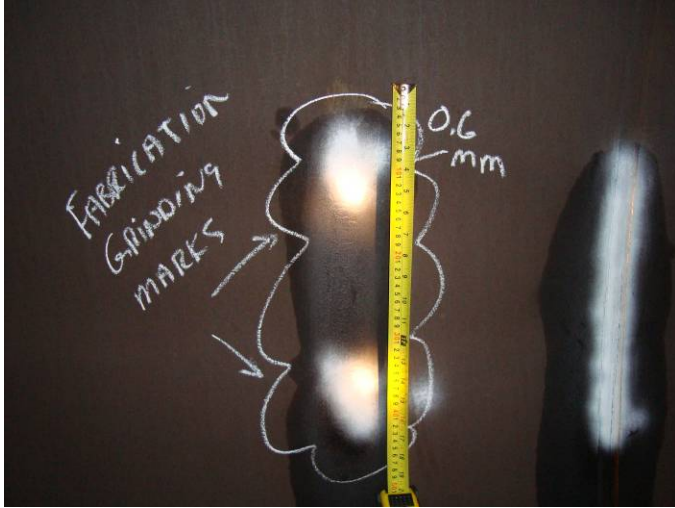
Mechanical marks on interior shell looking West between #7 and #8 circ welds
